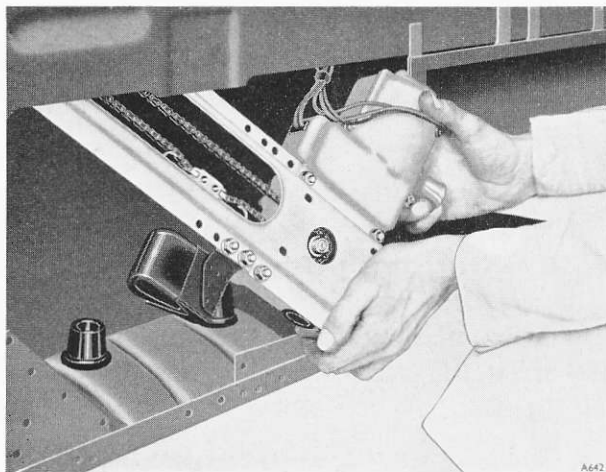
Method of removing the mechanism assembly from the left-hand front door
